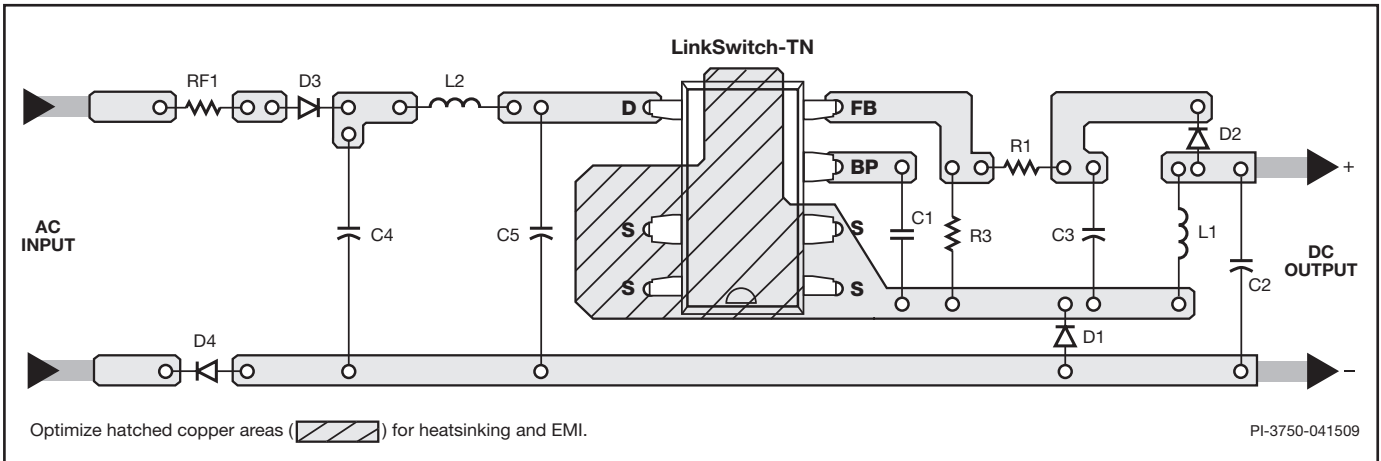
Recommended Printed Circuit Layout for LinkSwitch-TN in a Buck Converter Configuration using P or G Package.
